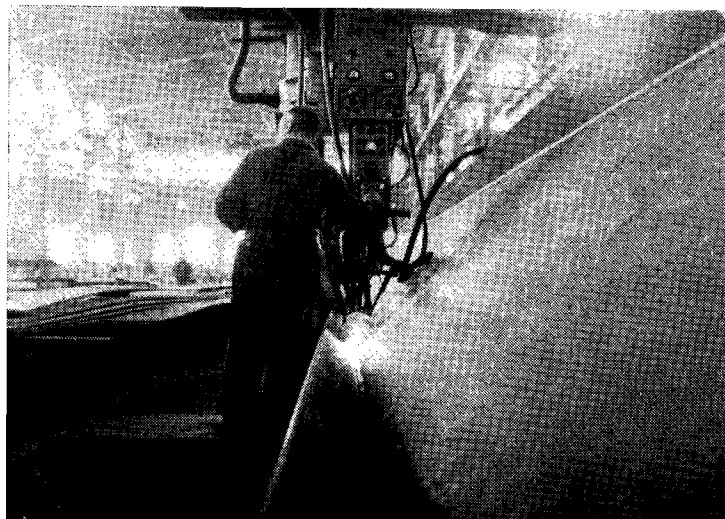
Welding a girder flange to the web using a single head, fully automatic machine.
